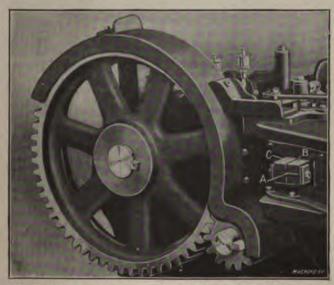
Ajax Upsetting and Forging Machine showing Safety or Shear Bolt, providing a Safety Relief for the Gripping Dies
